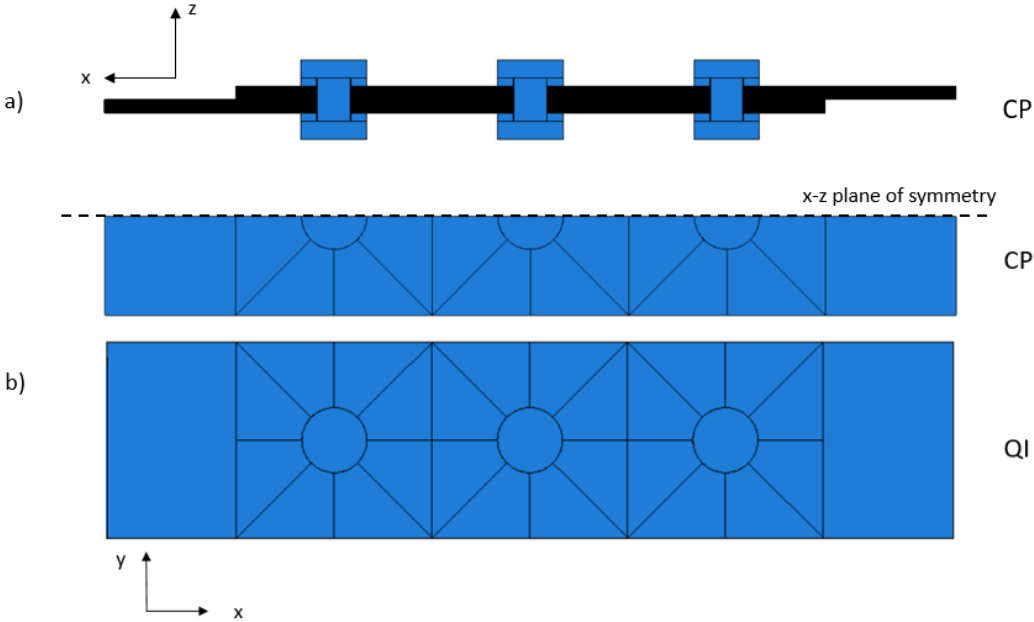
Geometry of OB and HBB Joints Specimen a) Side View b) Top View
